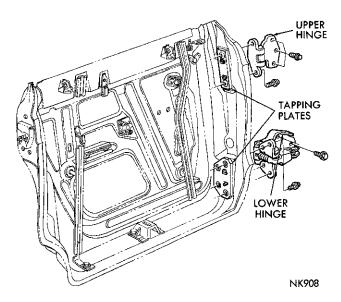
Rear Door Hinge Attachment (Chrysler)
